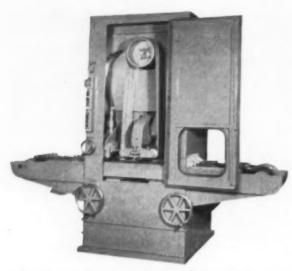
The "deadhead" or platen-type backup for the same type of conveyerized machine shown in Fig. 4
